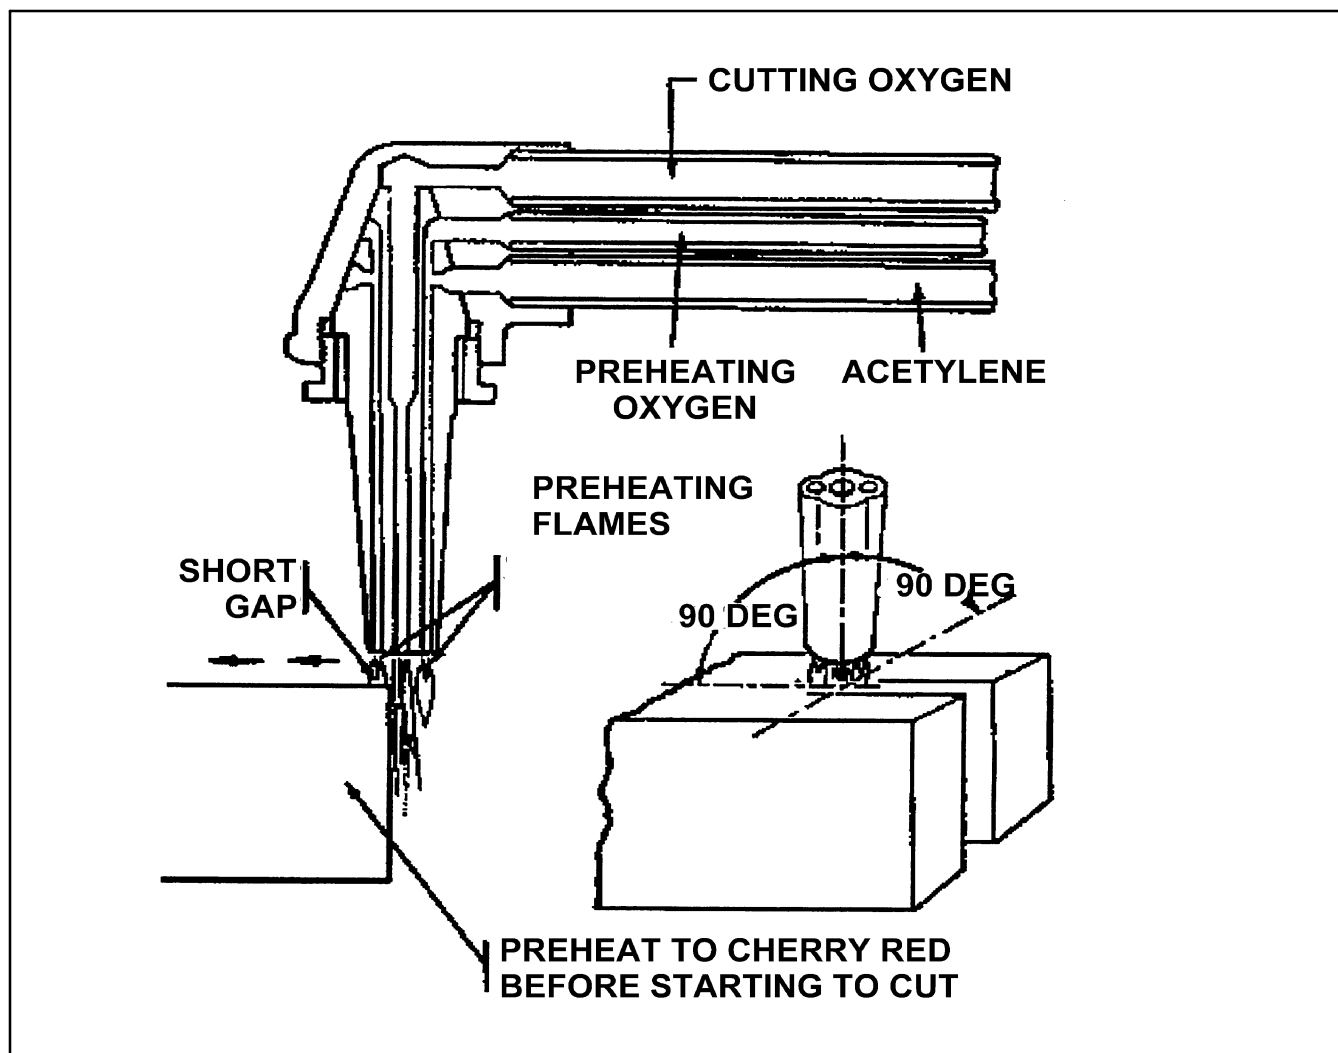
Starting a Cut and Cutting with a Cutting Torch
